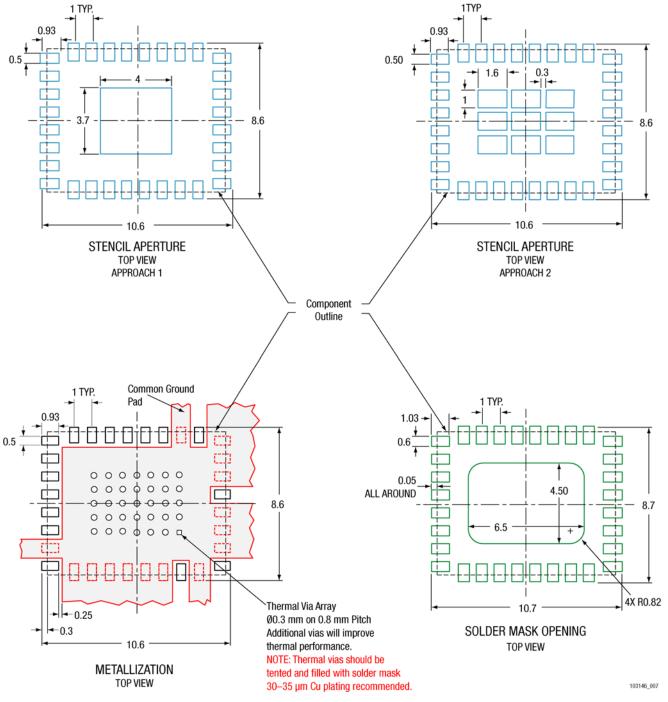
Phone PCB Layout Footprint for 8 x 10 mm, 32-Pin Package - SKY77500
